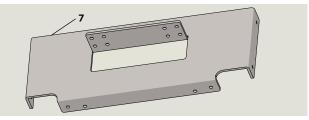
Motion Assist 360 drive and mounting plates
